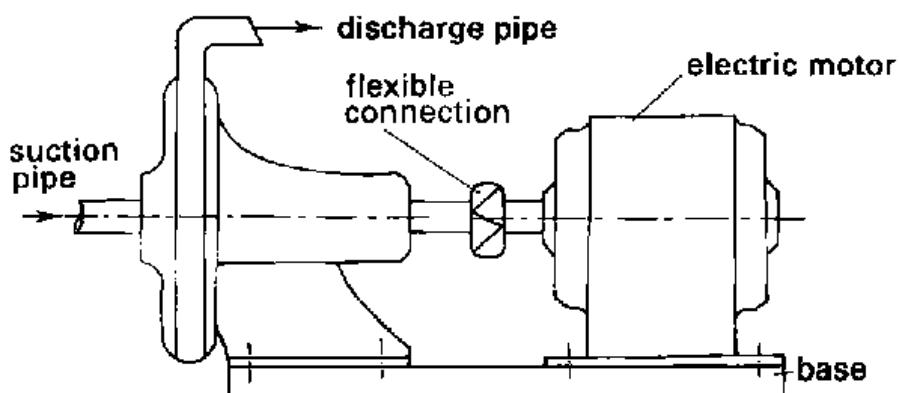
AN EXAMPLE OF A TYPICAL MOTOR – PUMP LAYOUT.
